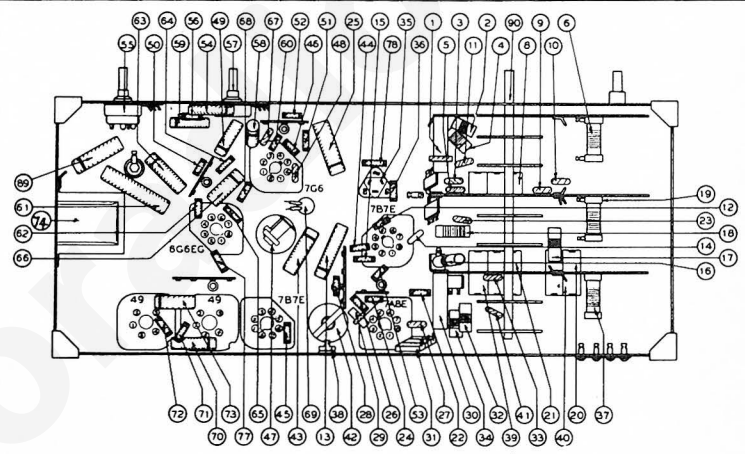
LOCATIONS OF PARTS—UNDER CHASSIS, Model 42-762
